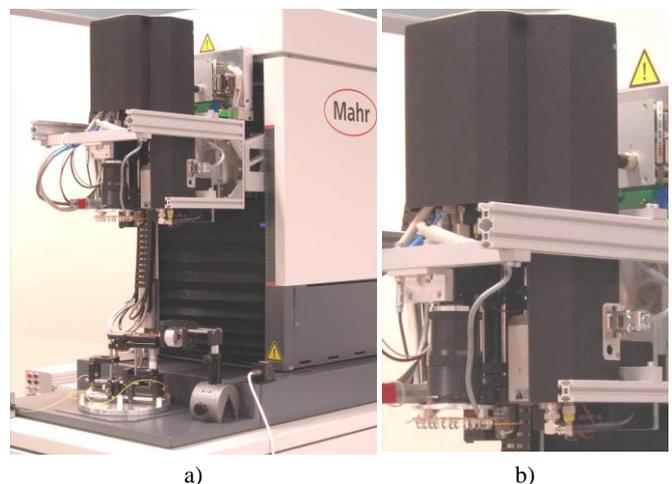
(a) AMMS Demonstrator with three sensors; (b) zoom into the sensor head
